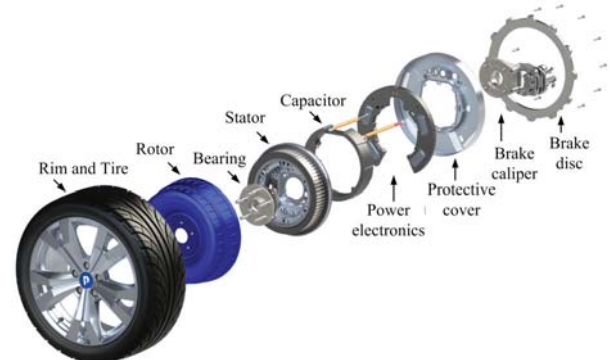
Exploded view of a modern integrated in-wheel PM motor system.
